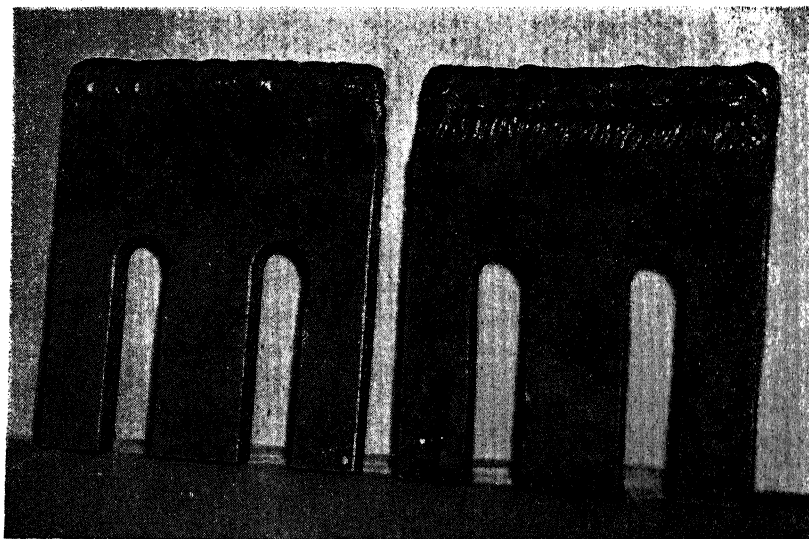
Bone cutter knives used by a meat packing plant. Worn face built up with mild steel electrode as shown on right. Cutting edge on front and on back (left) hard-faced with several passes of tool steel electrode. Knives are then ground to a sharp point. Saving for a set of 16 knives approximately \$22.00.
